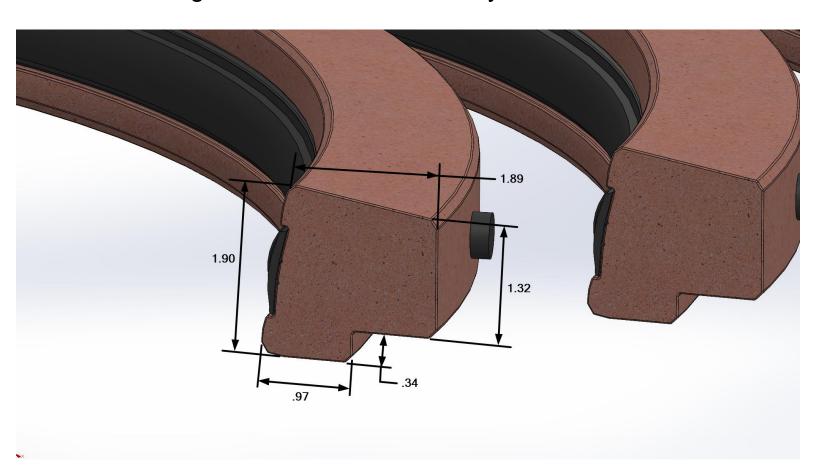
Figure X. Key Dimensions and Tolerances to use when Designing your Table:
